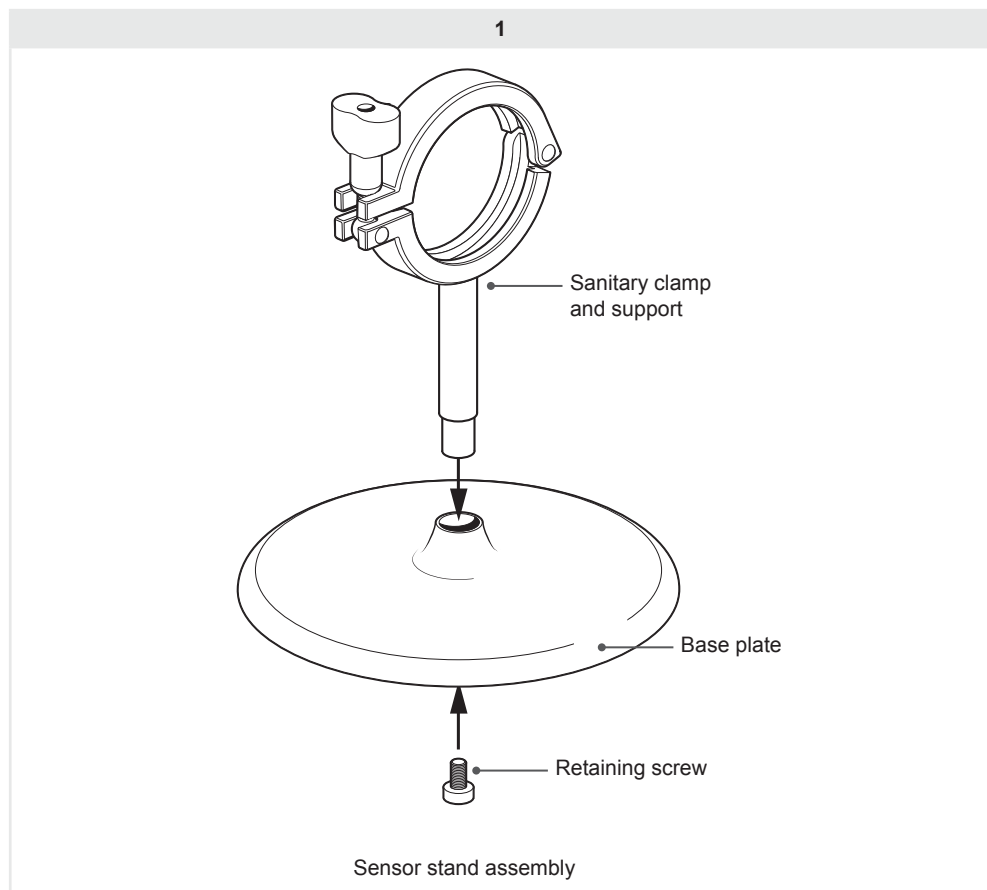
Sensor stand assembly: Attaching the clamp and support rod to the base plate.
